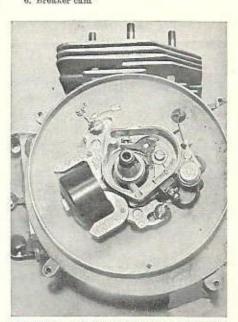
Timing ignition on models 175, 270 and 271. Punch mark on stator near upper mounting screw should align with 35° mark on stator backing plate.
